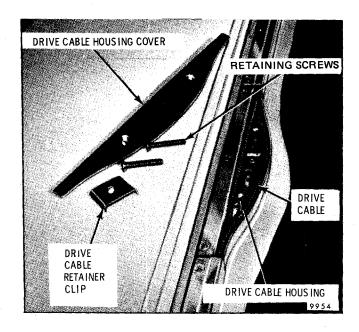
Removing Drive Cable Retaining Clip - E and K Styles
